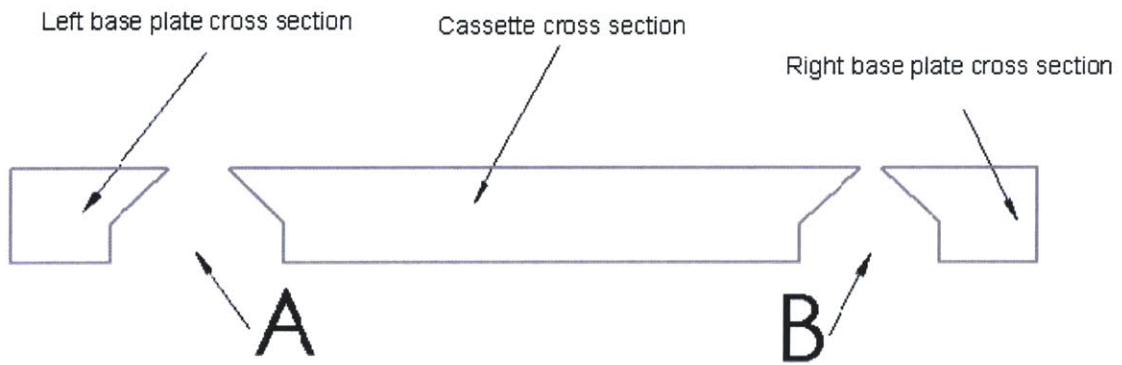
Base plate and cassette cross section after undercut chamfers
